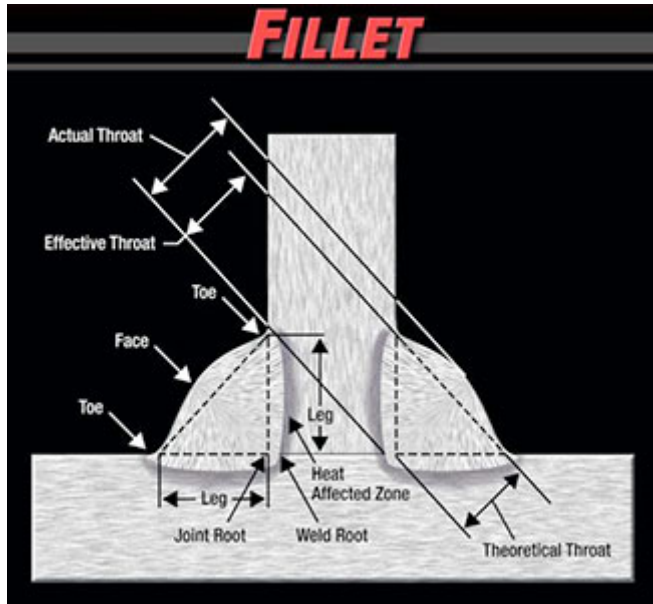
Parts of a Fillet Weld (by Lincoln Electric, Public Domain)
